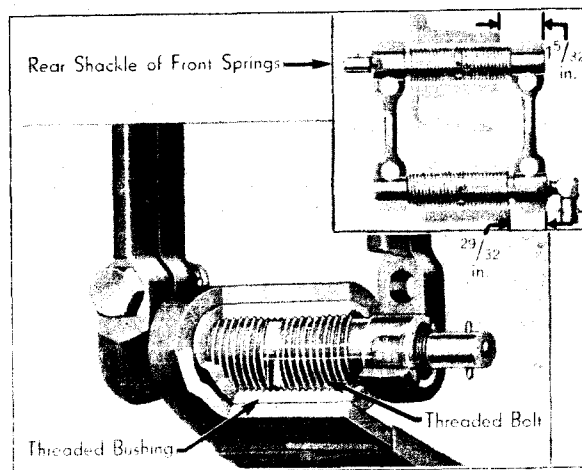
Spring shackle bolts are threaded into the bushing to provide greater bearing surface for the vertical load and to prevent side sway. The rear shackle for the front springs must be set to a specific dimension
